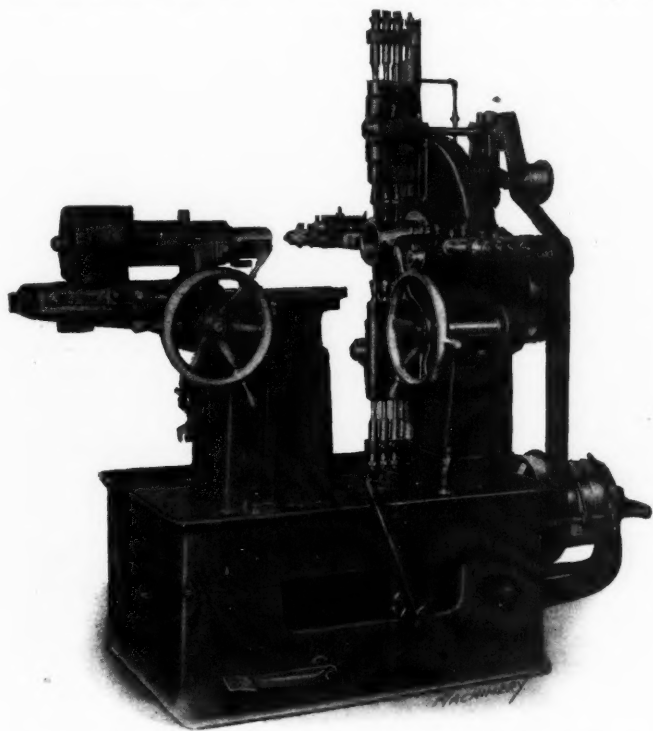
Langelier Multiple-spindle Machine for drilling Motor Valve Sleeves
